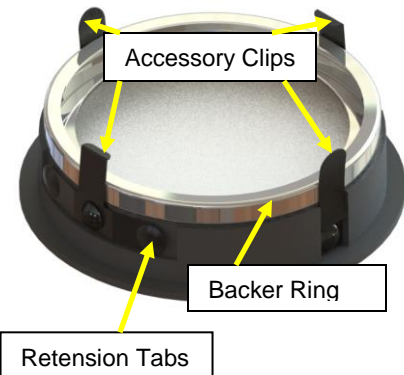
Accessory Clips, Retention Tabs, Backer Ring.
